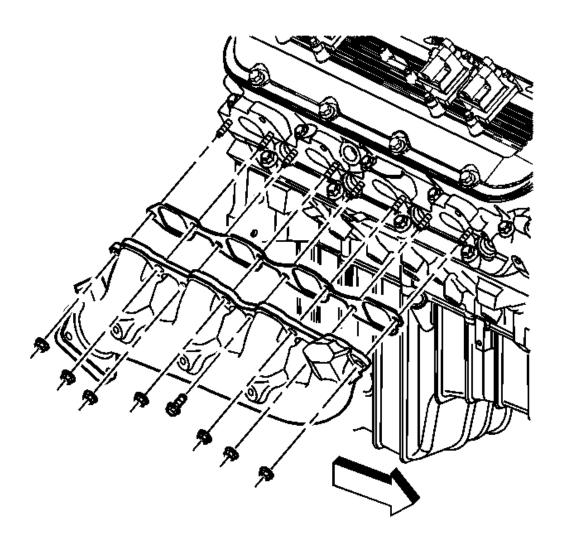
View Of Exhaust Manifold, Nuts & Center Bolt (Right) Courtesy of GENERAL MOTORS CORP.
